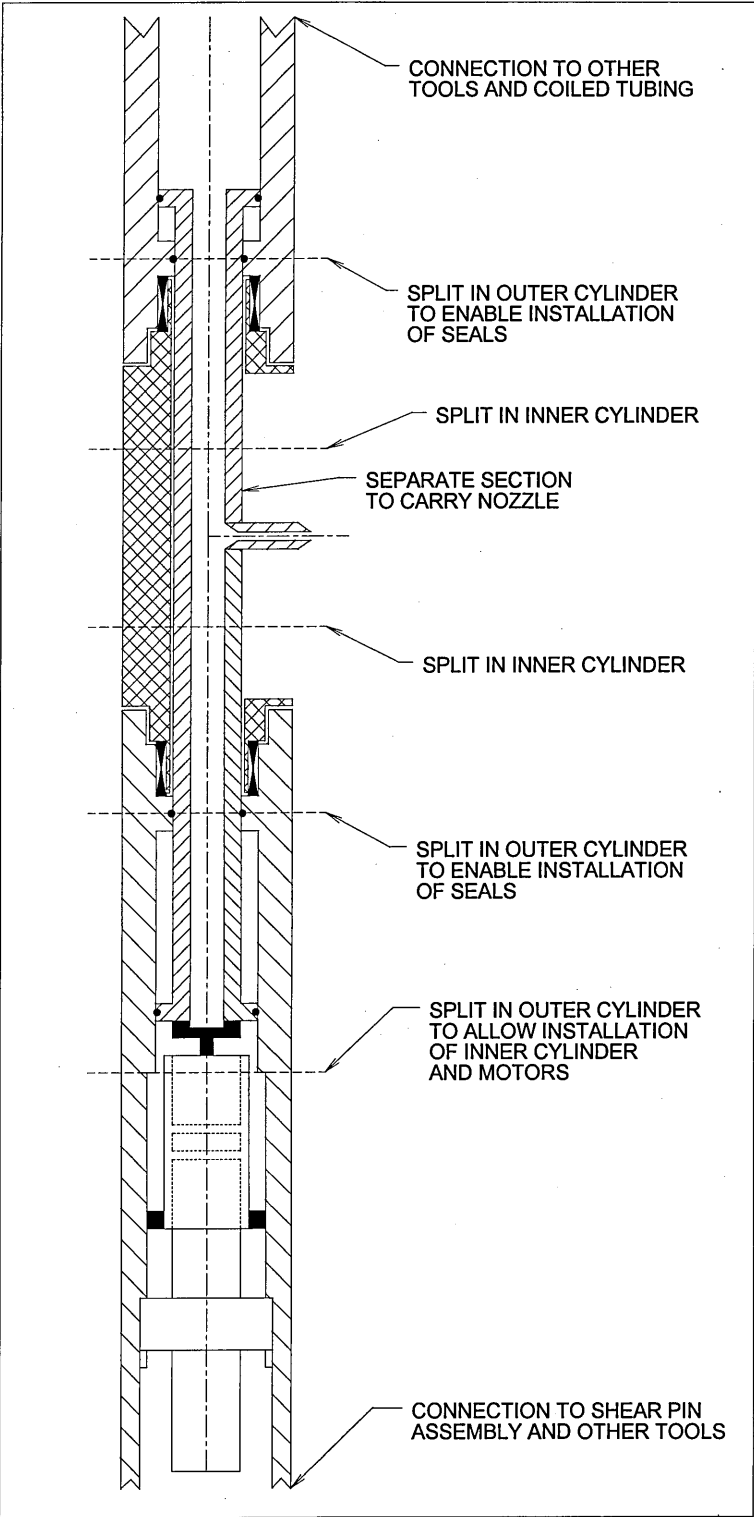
POSSIBLE POSITIONS OF SCREW THREADED CONNECTIONS TO ENABLE ASSEMBLY
